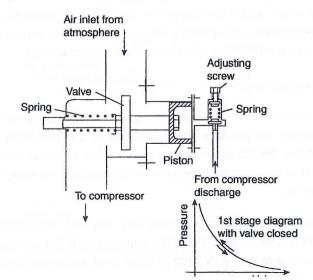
shows diagrammatically a compressor unloading valve fitted to the compressor suction. When the discharge air pressure reaches a desired value it will act on the piston causing the spring-loaded valve to close shutting off the supply of air to the compressor.
